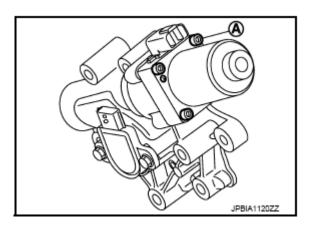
Locating Actuator Motor Mounting Bolts (Never Loosen) Courtesy of NISSAN NORTH AMERICA, INC.
